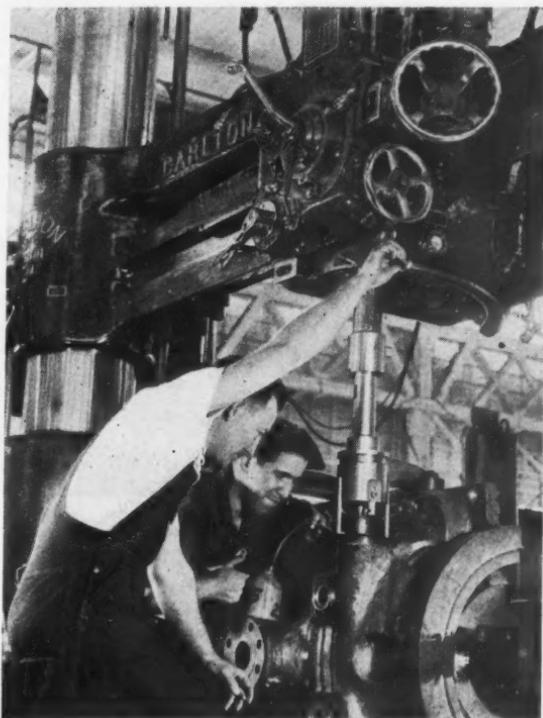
Using a Radical Drilling Machine and Collapsible Tap to Tap the Steam Intake Valve on a High Pressure Cylinder for an 8,500 H.P. Steam Turbine
